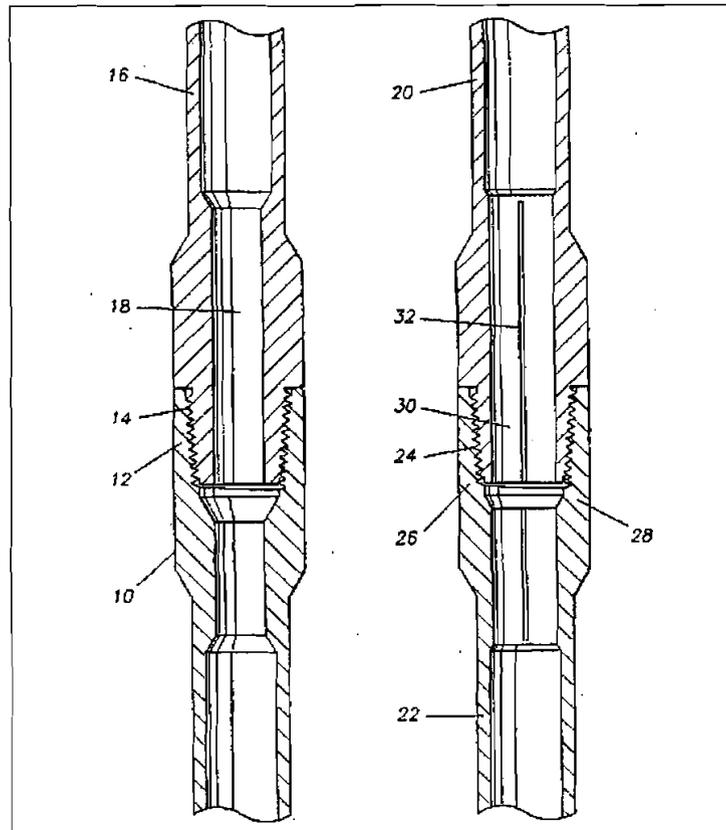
Conventional (left) and Improved (right) Tool Joints for Slim-Hole Coring (Chatagnier and Head, 1995)
